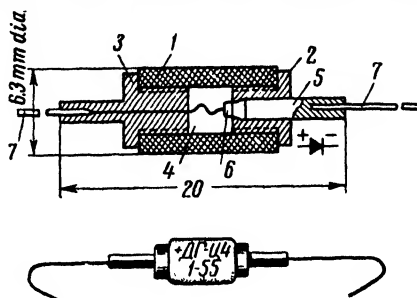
The design principle and external view of point-contact diodes type ДГ-11: 1 — ceramic cartridge; 2 and 3 — metal flanges; 4 — contact spring; 5 — crystal holder; 6 — germanium; 7 — terminals
